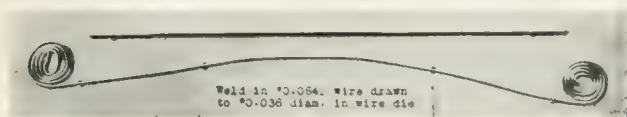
SAMPLE OF WELDED ALUMINUM WIRES
